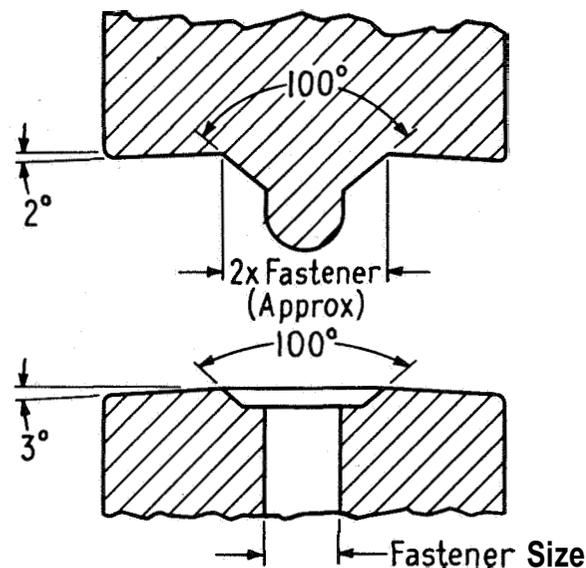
SCHEMATIC DRAWING OF TOOLING FOR COINED CONE DIMPLING (Ref. 79)
